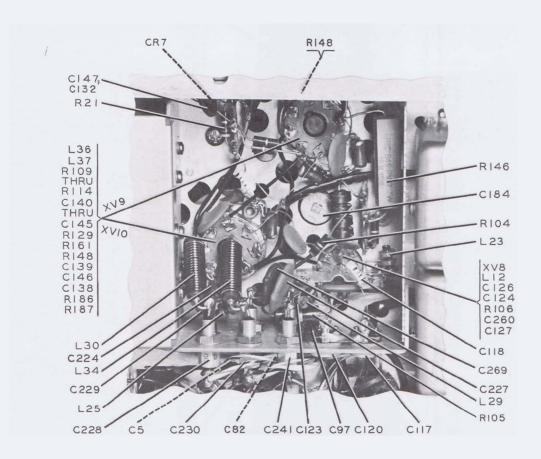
PA Grid Compartment, Bottom View, Parts Identification
